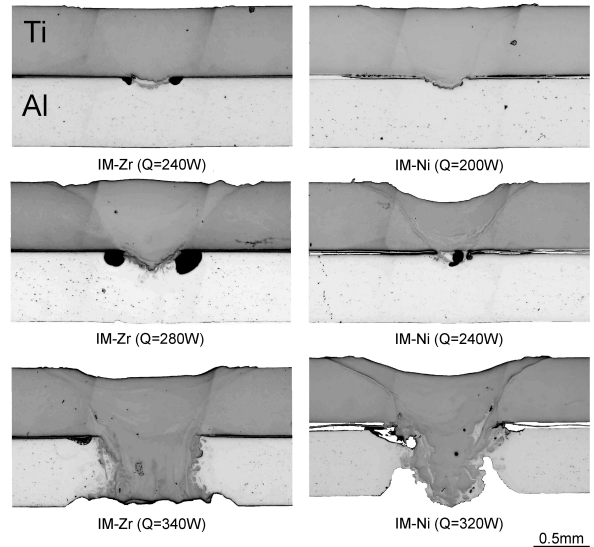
Macrostructures of welded joints (PW=7.5ms).
